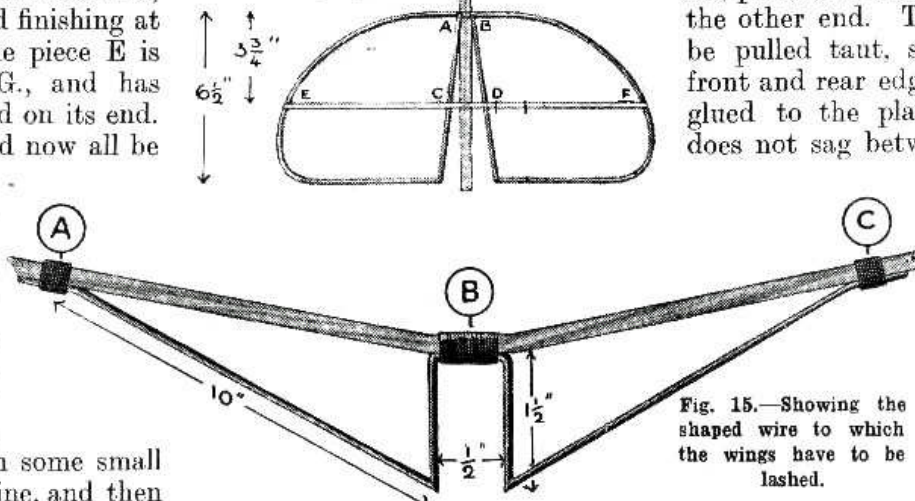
Showing the shaped wire to which the wings have to be lashed.
